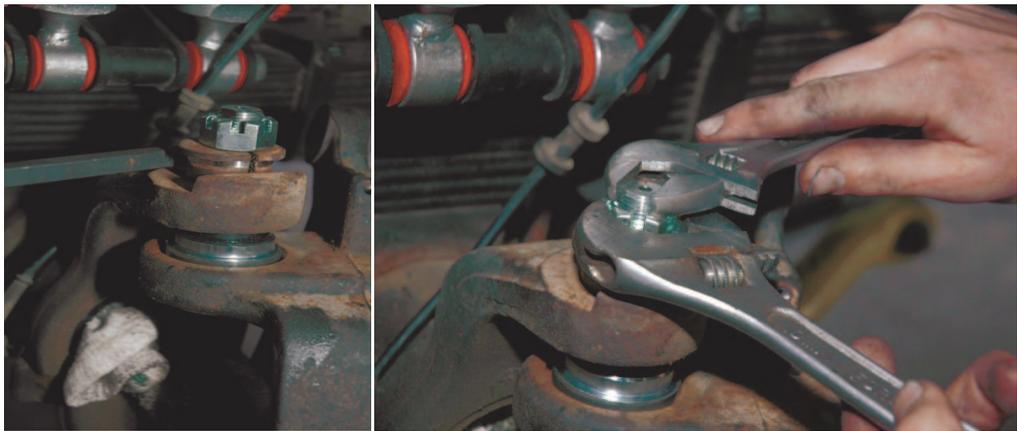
, Pry Bar to Leverage Camber Bushing    Figure 51, Tightening the Upper Ball Joint
